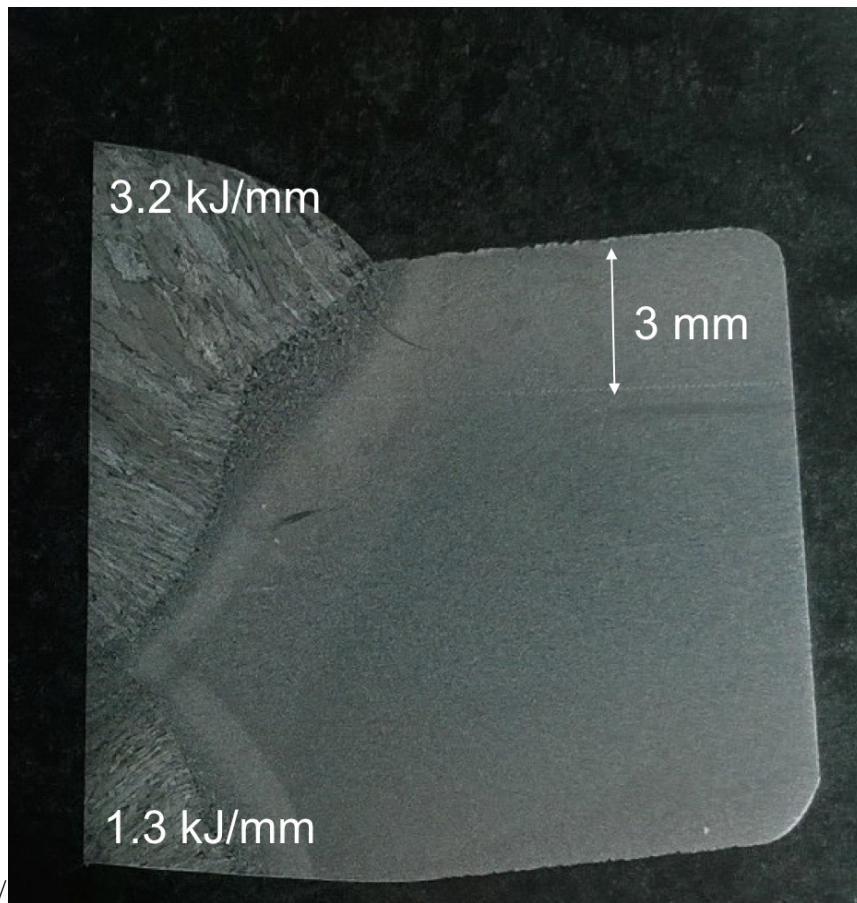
Section of welded sample showing profiles of high and low heat input passes.
